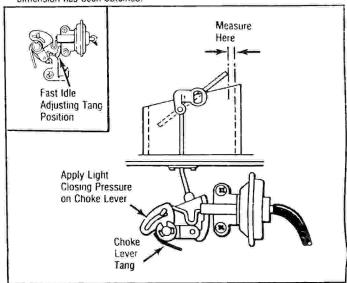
Fast Idle Cam Adjustment (Remote Choke Models)
